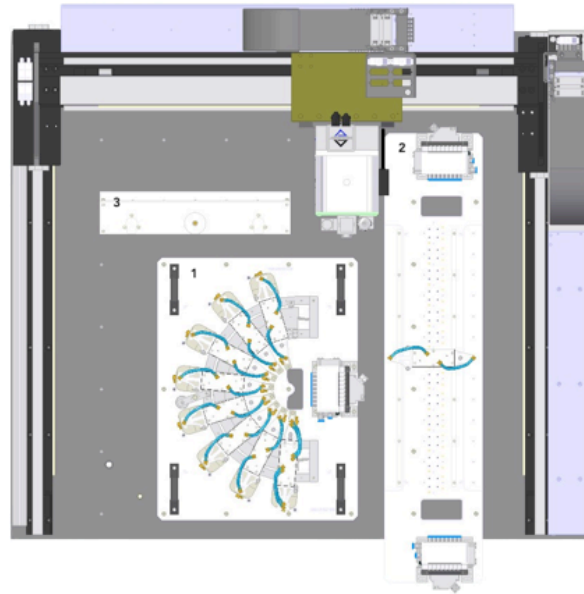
A schematic of the loading tooling mounted on the Oxford gantry showing the ring loading plate (1), the module park position plate (2) and the gantry tool rack (3).
